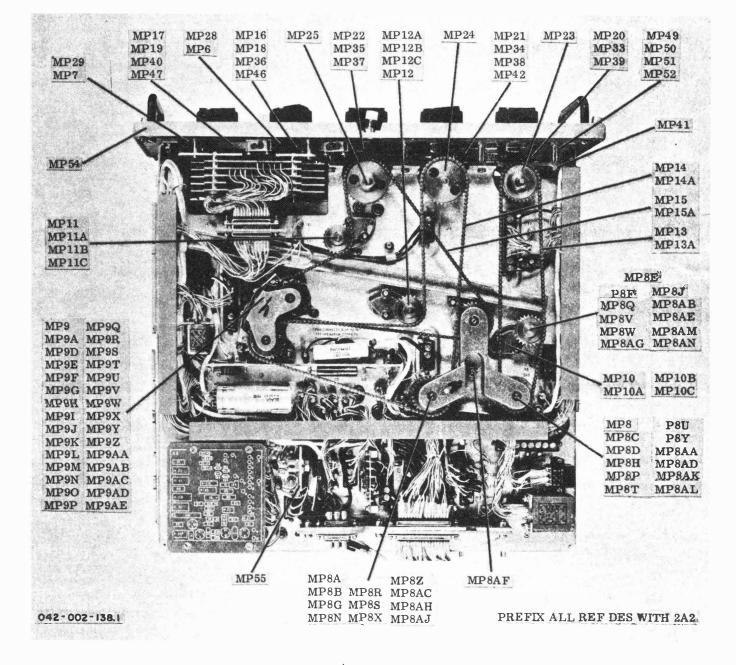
T-827B/URT Chassis Less Assemblies, Top View, Component Location
